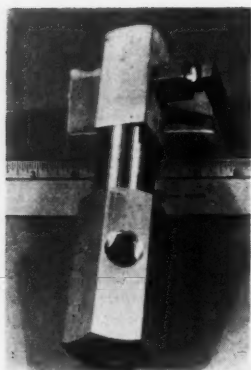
FARRIS 1/2-IN. SAFETY RELIEF VALVE
